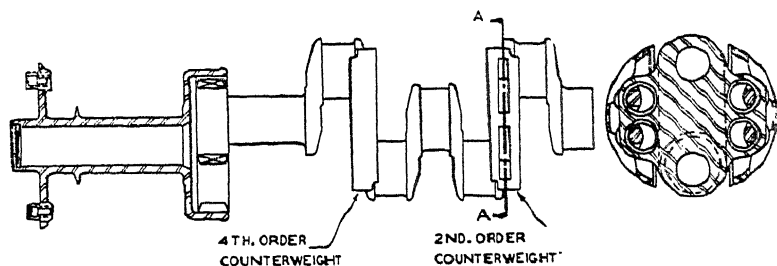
Lycoming four-cylinder opposed engine crankshaft.
